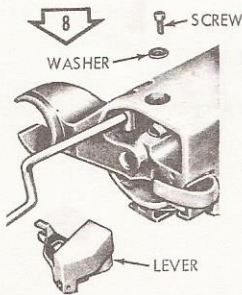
Disassembly/Assembly of Grenade Launcher (Operator and Organizational Maintenance)
